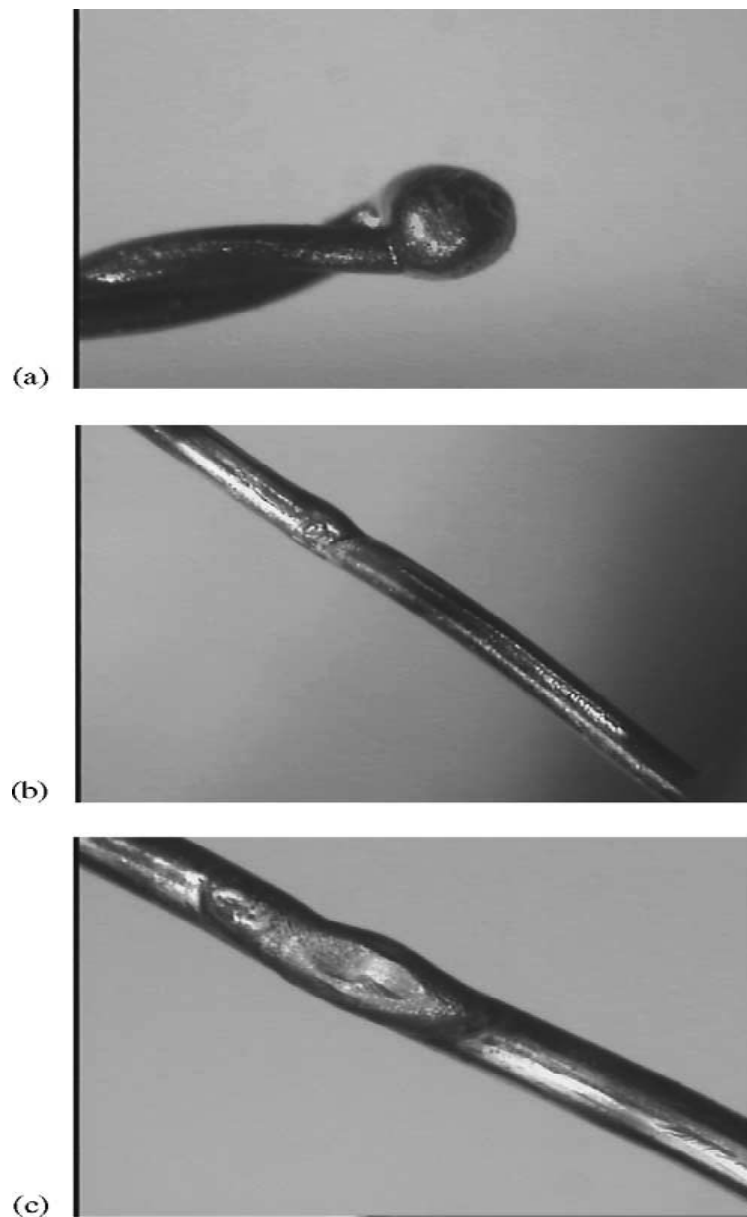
Typical weld geometry for 0.5 mm diameter thermocouples. (a) Argon arc welded, (b) diode laser welded and (c) Nd:YAG laser welded (Triantafyllidis, Schmidt & Li, 2003)
